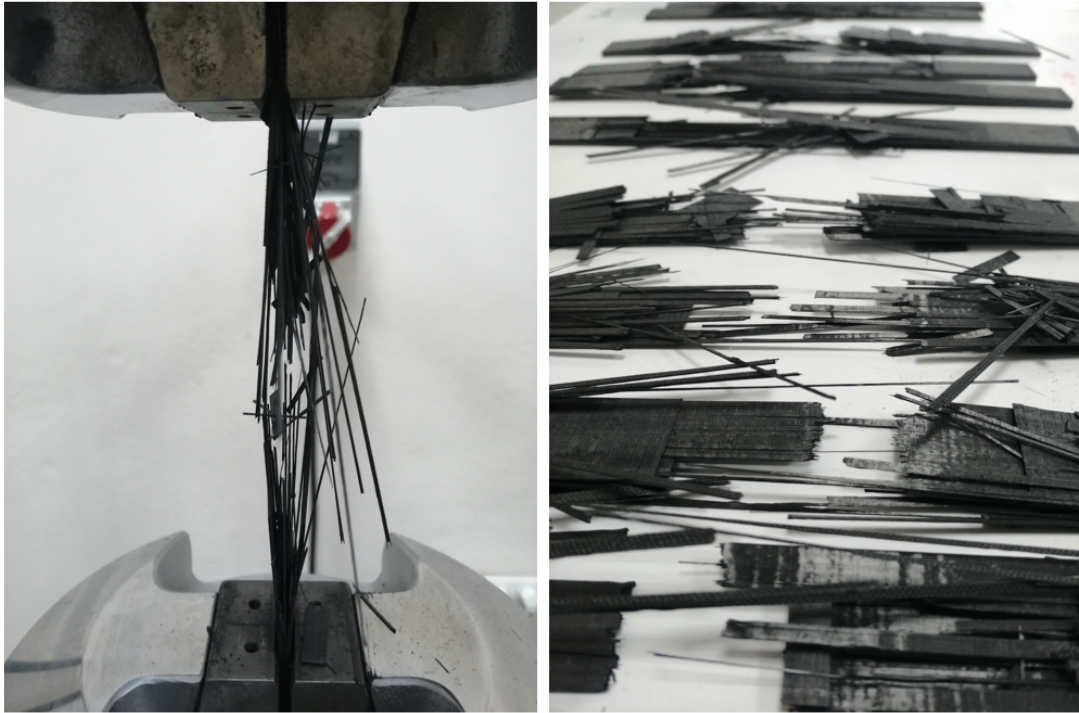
Fiber fracture failure mode in hybrid CFRP composites after tensile test
